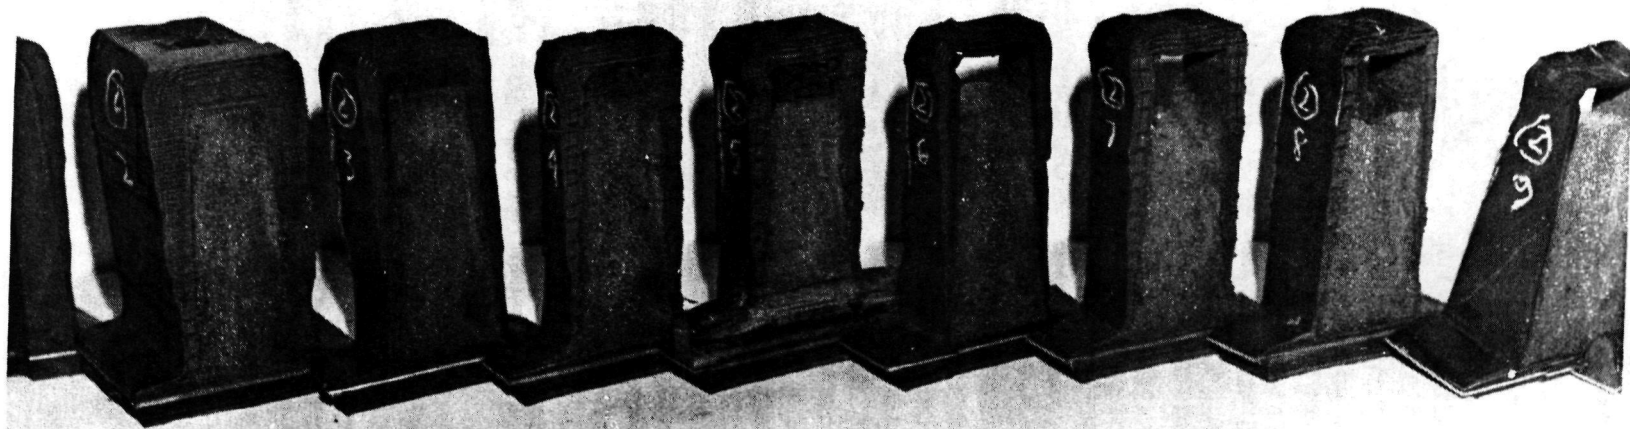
TEST #4, FRAME S/N 2; FRACTURE ANALYSIS SECTIONS CUT FROM LEFT CURVED AREA OF FRAME.
